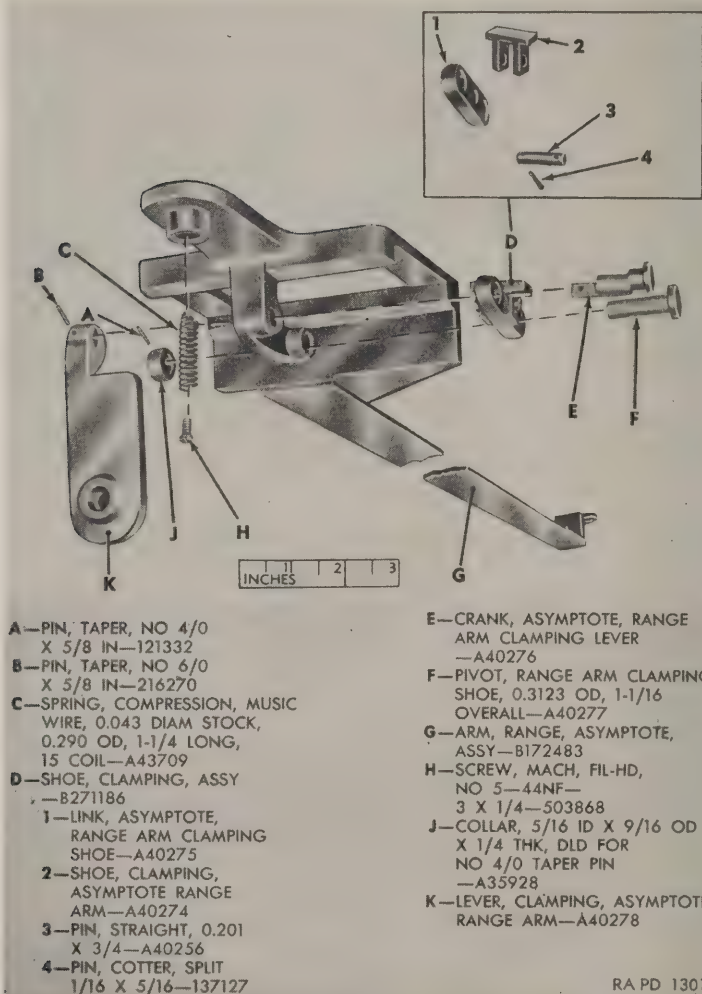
Disassembly of the asymptote range arm clamping mechanism—sound-ranging plotting board M1 or M1A1.
